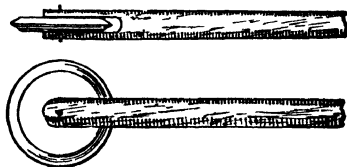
Two Views of Home-made Wheel Glass-cutter.
